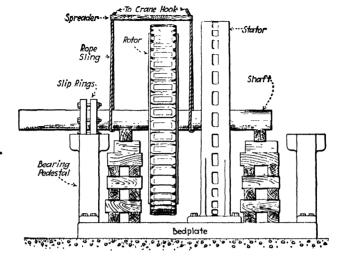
Showing first step in a method of threading the rotor of a synchronous motor through its stator.
